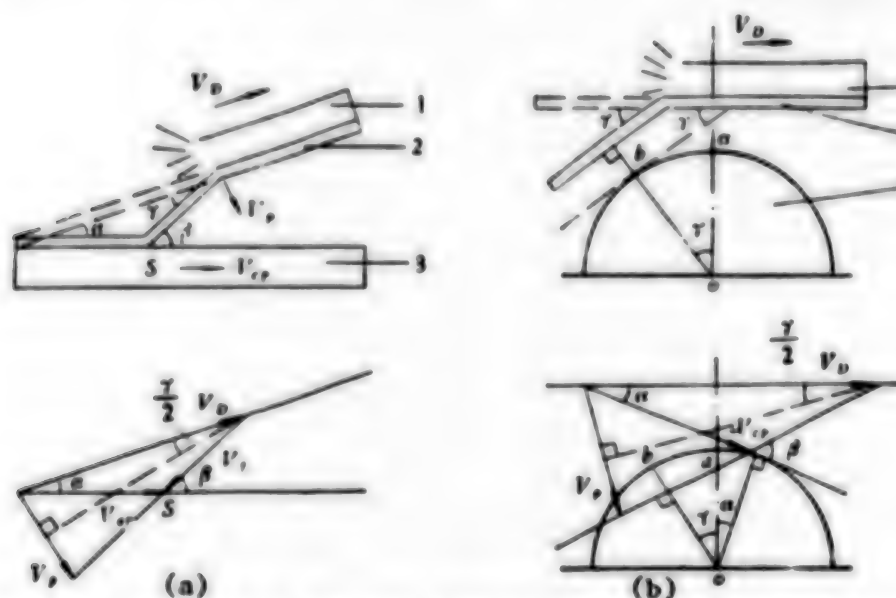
Explosive Welding Installations and Welding Parameters
